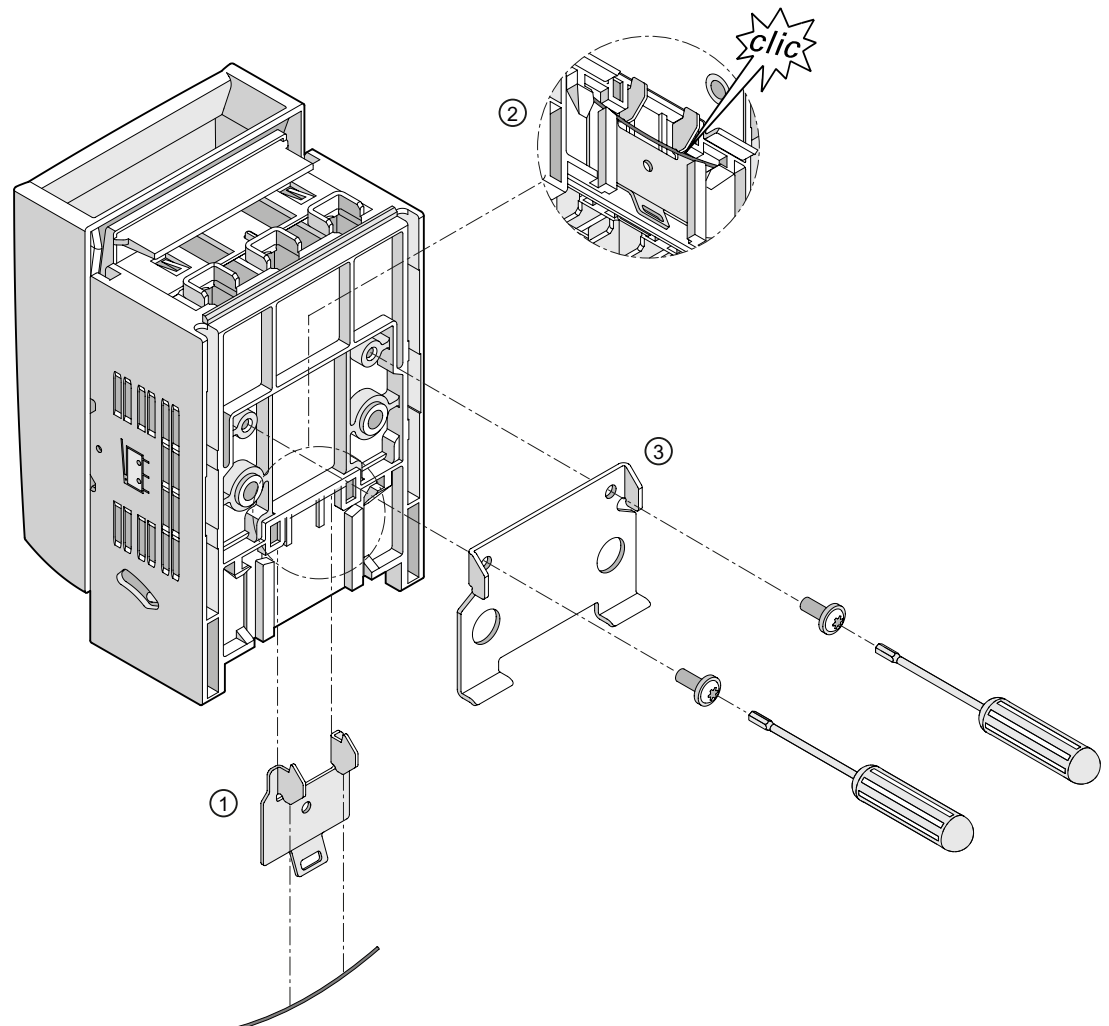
Mounting the fuse switch disconnecter, size 000 onto a standard rail (1)
